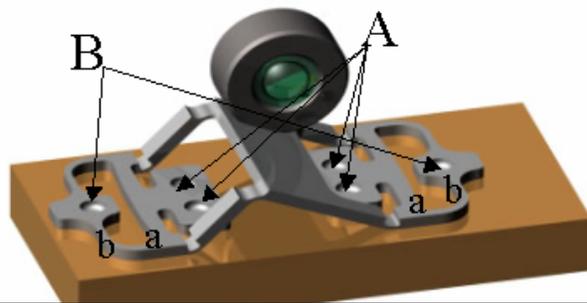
Phasebridge's three-hinge weld clip.
